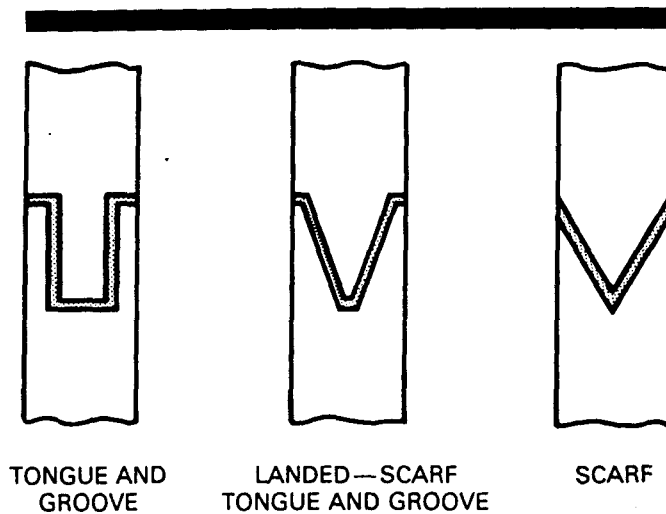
Adhesive Bonded Butt Joint Designs for Machined or Extruded Shapes
